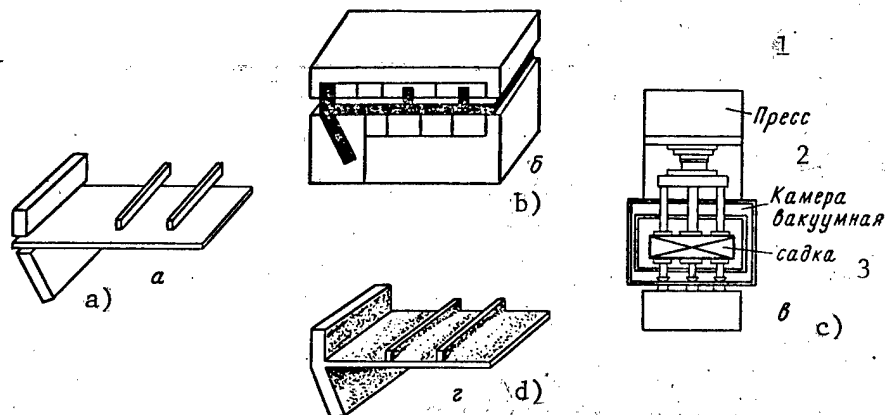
Diagram of Process of Diffusion Welding of Stock of Complex Shape:
